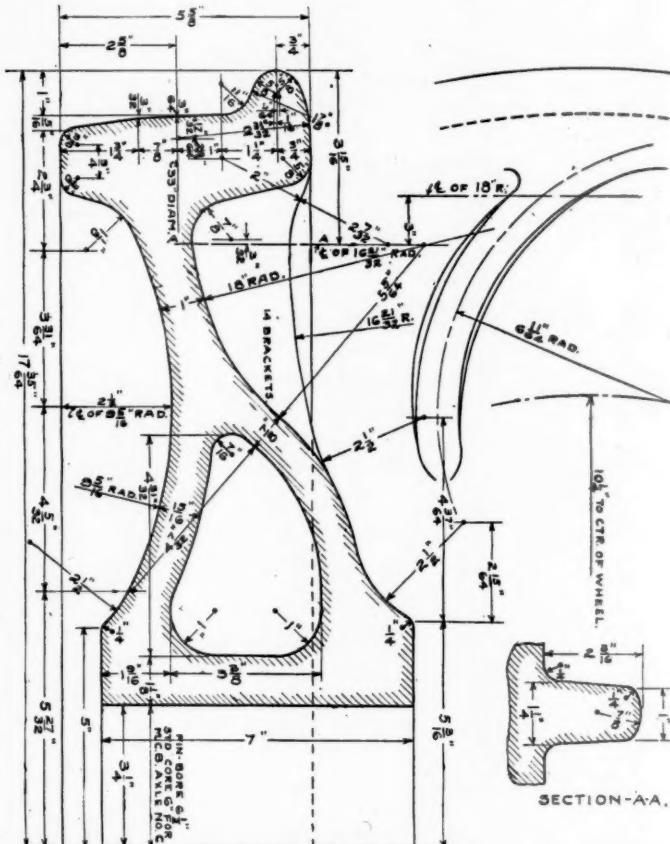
Section of 700-lb., 33-In. Cast-Iron Wheel Adopted to Replace the 675-lb. Wheel
